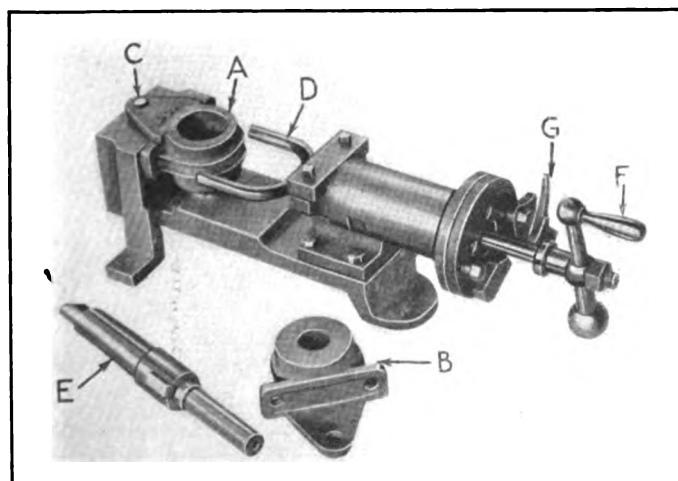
CAR BEARING BRACKET-BORING FIXTURE
